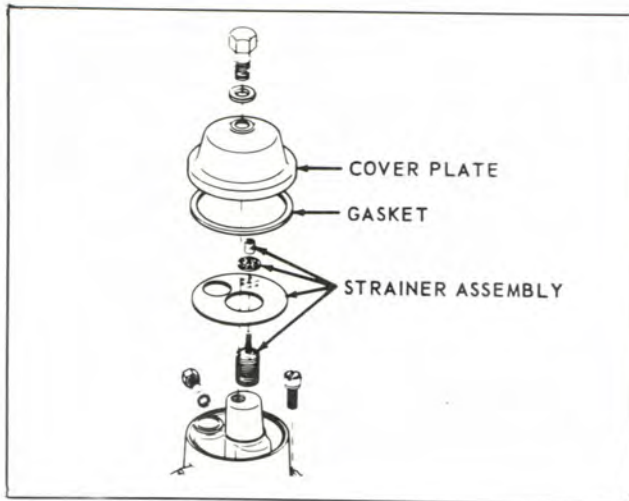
Cleaning Fuel Pump Strainer Assembly
